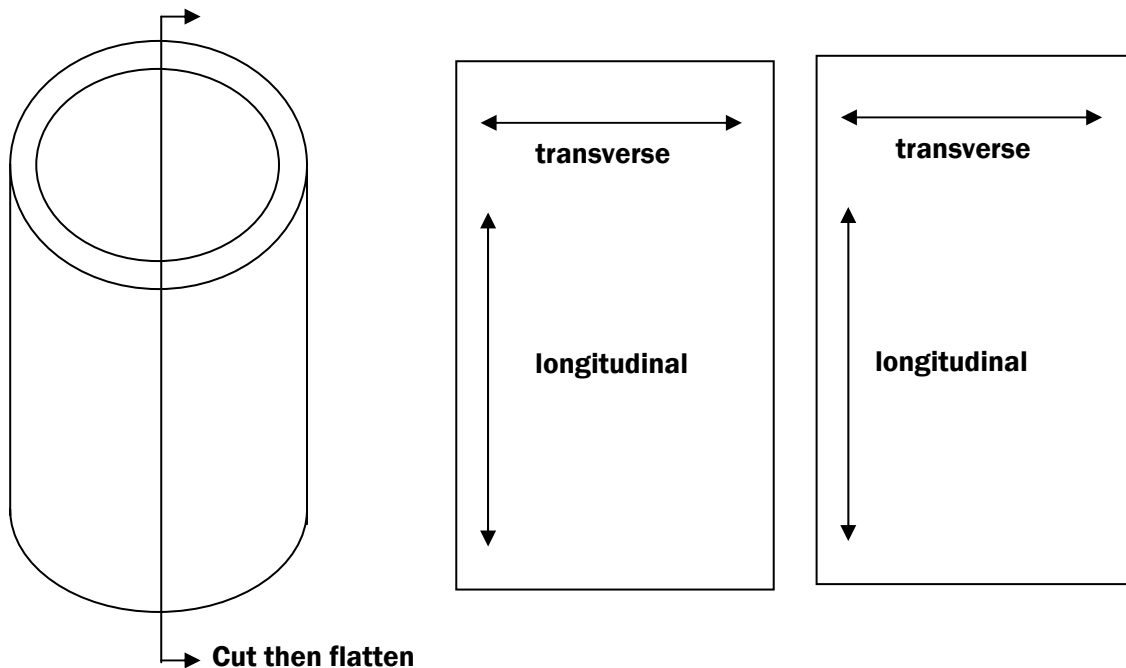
Schematic Drawing showing How Plate was Produced from Tube Allowing Creep samples to be Taken in Transverse Direction
